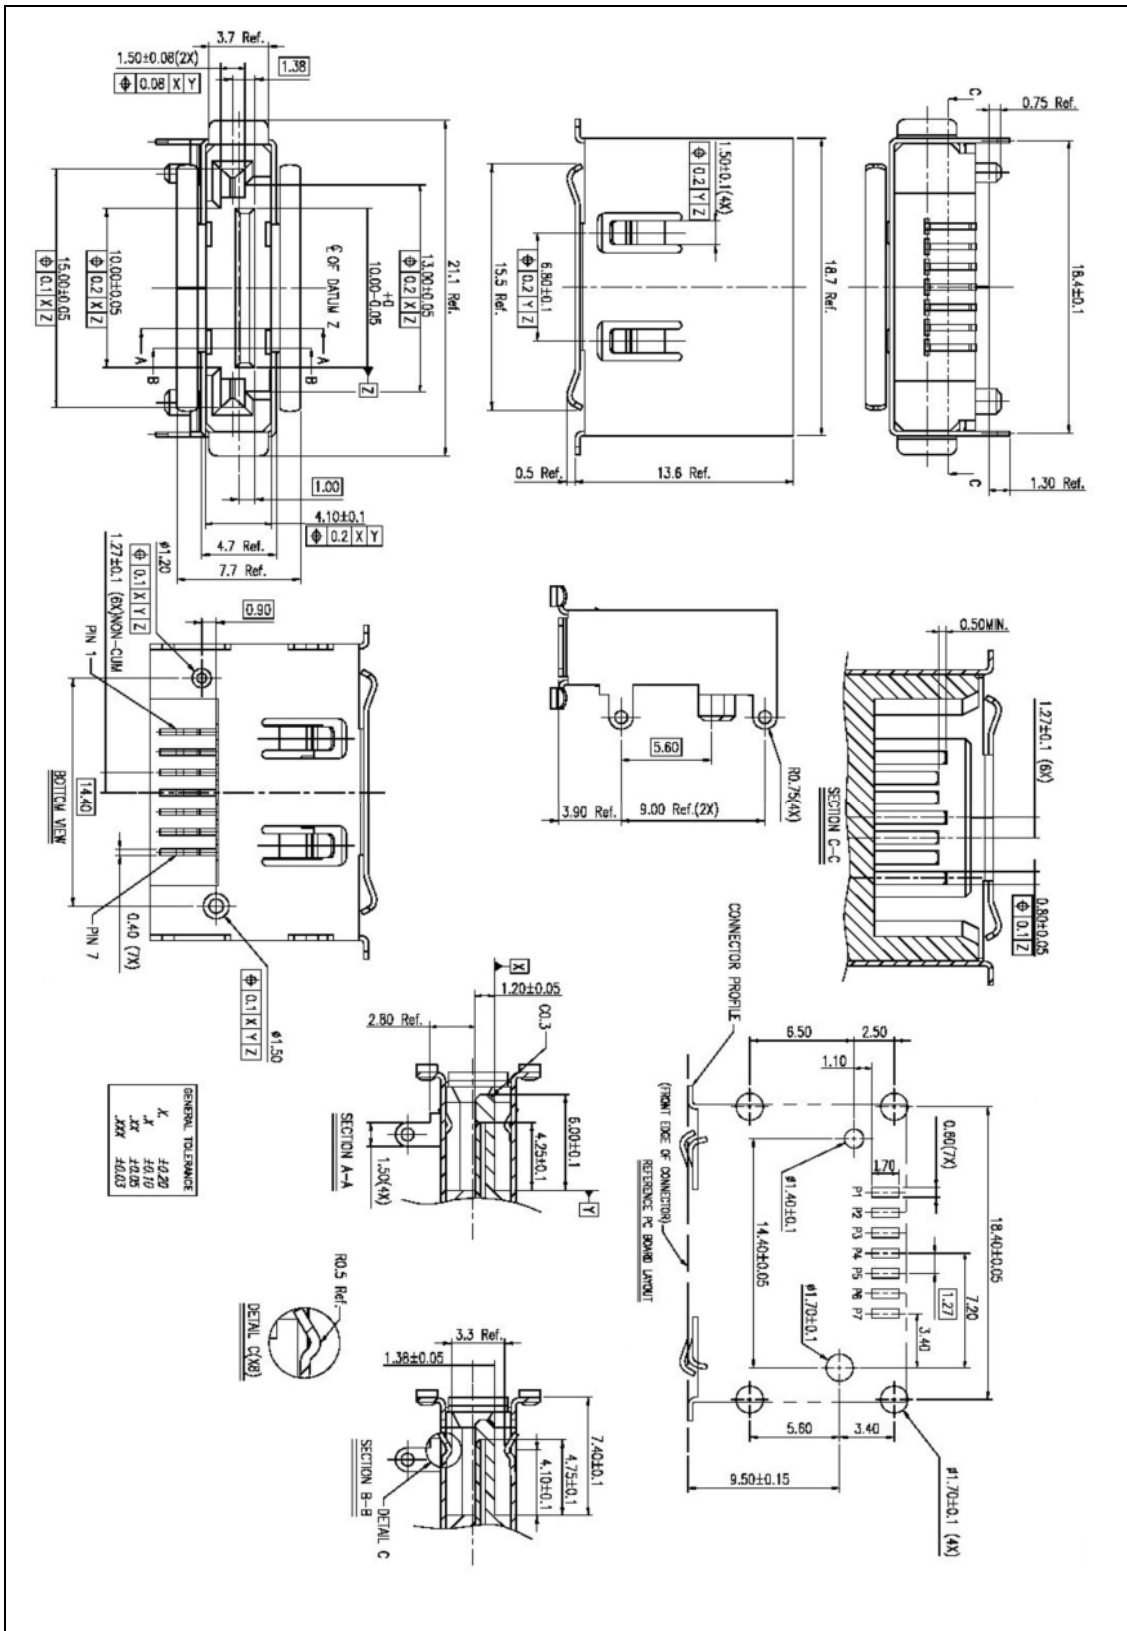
Mechanical dimensions of External SATA RA SMT plug – Reversed Pin Out
